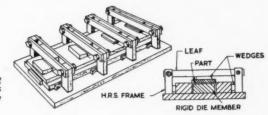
Hot straightening fixture for airframe parts formed from titanium alloy sheets
